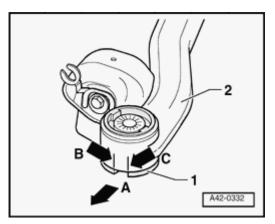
Ensuring Ends Of Rubber Beads On Hydraulic Bushing Align With Markings On Subframe Courtesy of VOLKSWAGEN UNITED STATES, INC.
